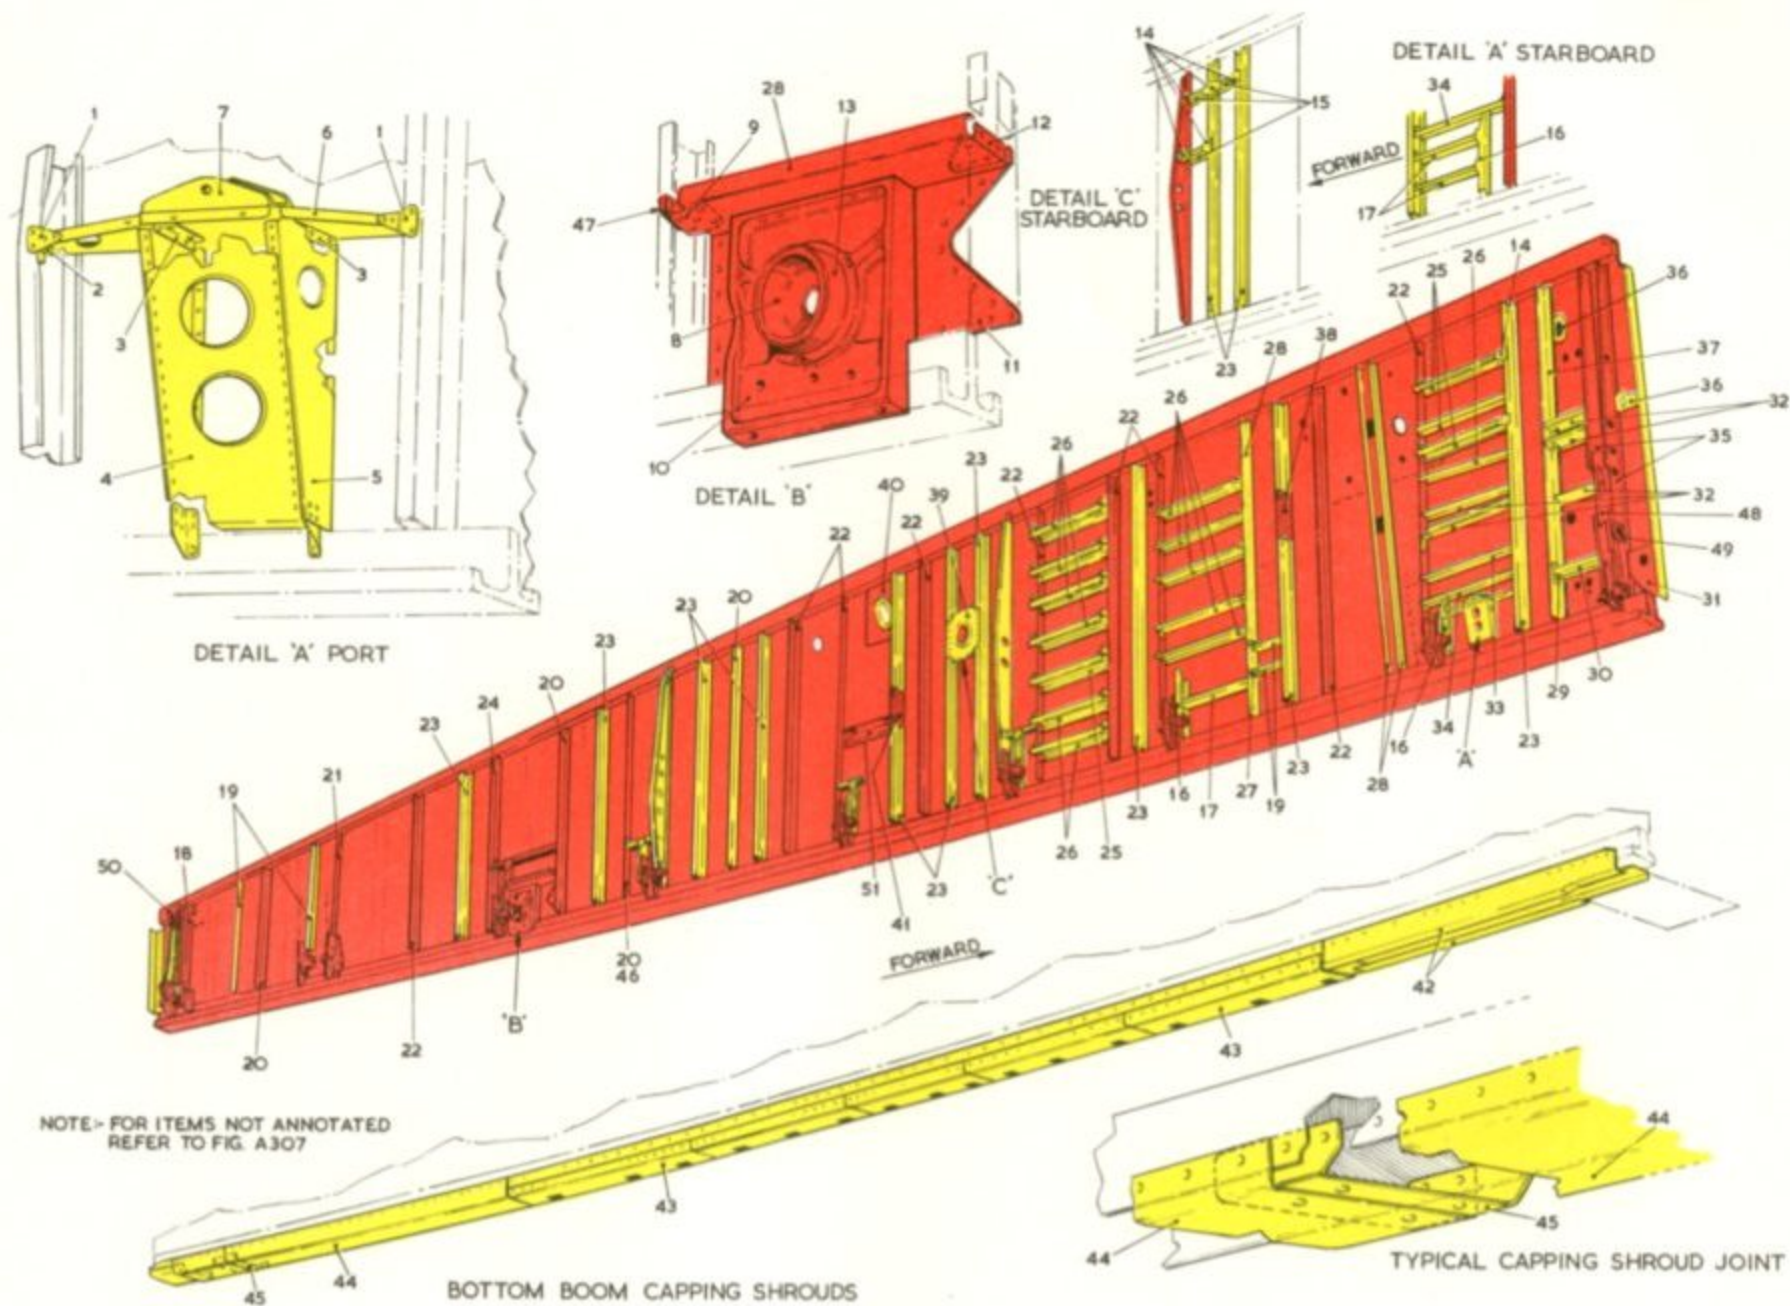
A Inboard engine rib - inboard face - port (Post Mod. 729)
